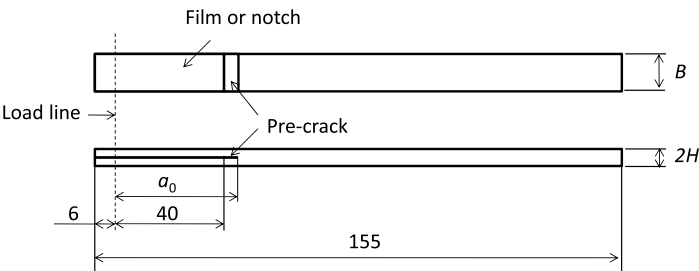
Schematic drawing of DCB test specimen. A pre-inserted Kapton film was used as the crack starter of UD, and 5HS–L–L and 5HS–T–T specimens. A machined notch (notch width 0.05 mm) was used for the crack starter for 5HS–L–T specimens. Before DCB testing, a precrack was induced using a flat-blade screwdriver.
